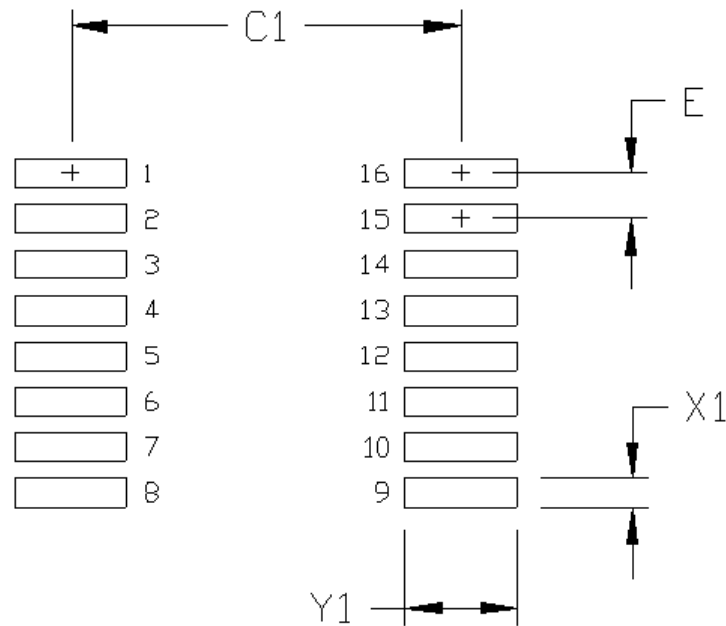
16-Pin QSOP PCB Land Pattern
